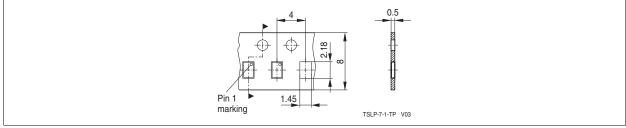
Tape & Reel Dimensions (Ø reel 180, pieces/reel 7500)
